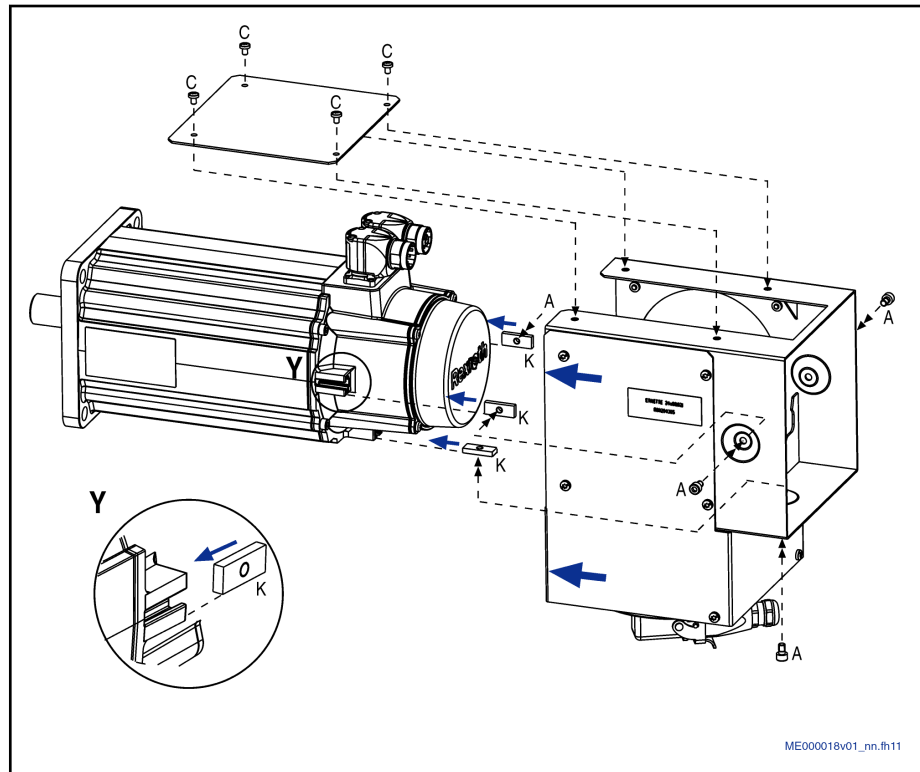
Assembly Fan Unit Radial, Flange Dimension 116/140
